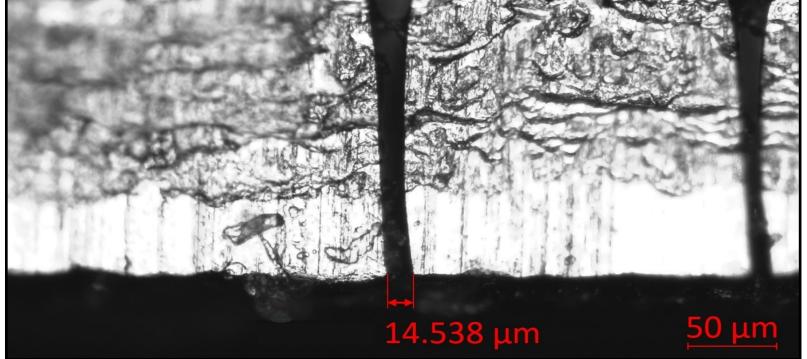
Cross-section view of the tungsten foil, machined with the F-Theta lens.
